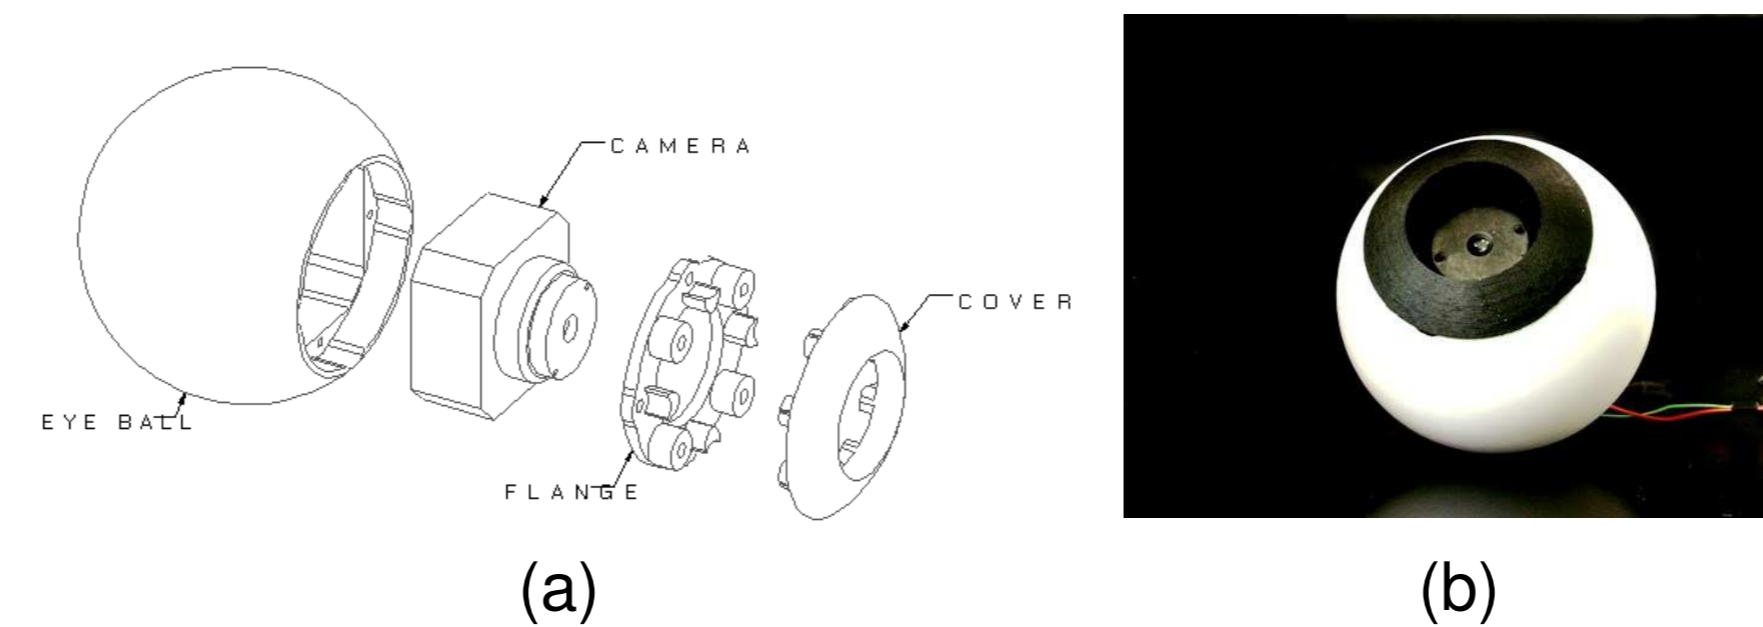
(a) exploded view of the eye-ball; (b) assembled eye-ball.
